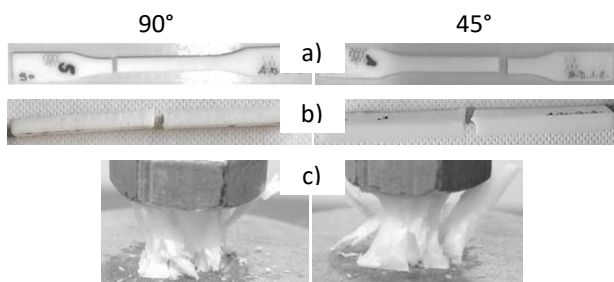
Fractured specimens printed by DLP-LCD after: a) tensile, b) flexure and c) compression testing.
